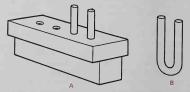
Scroll bending devices. Left. Metal block with pins that can be adjusted for different thicknesses of metal. Right. U-shaped bending fork made from a rod.
